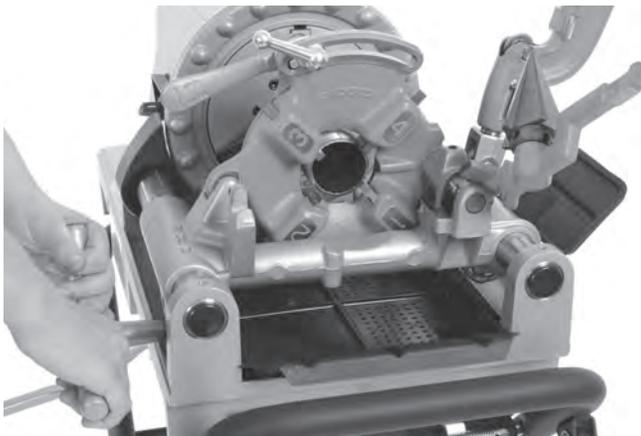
Threading Pipe (811-A Quick Opening Die Head shown)
